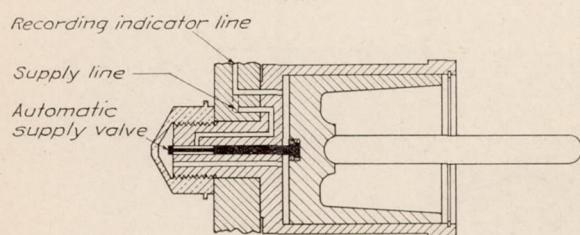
Views and section of torque-measuring cylinder showing automatic supply valve
